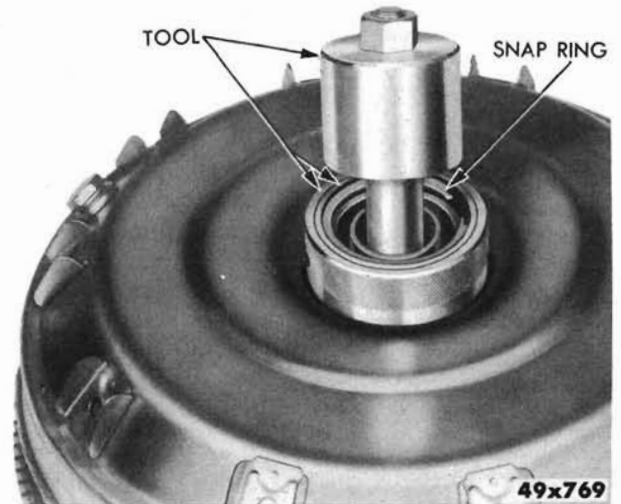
Tool and Snap Ring Positioned for Installing (Tool C-884)
